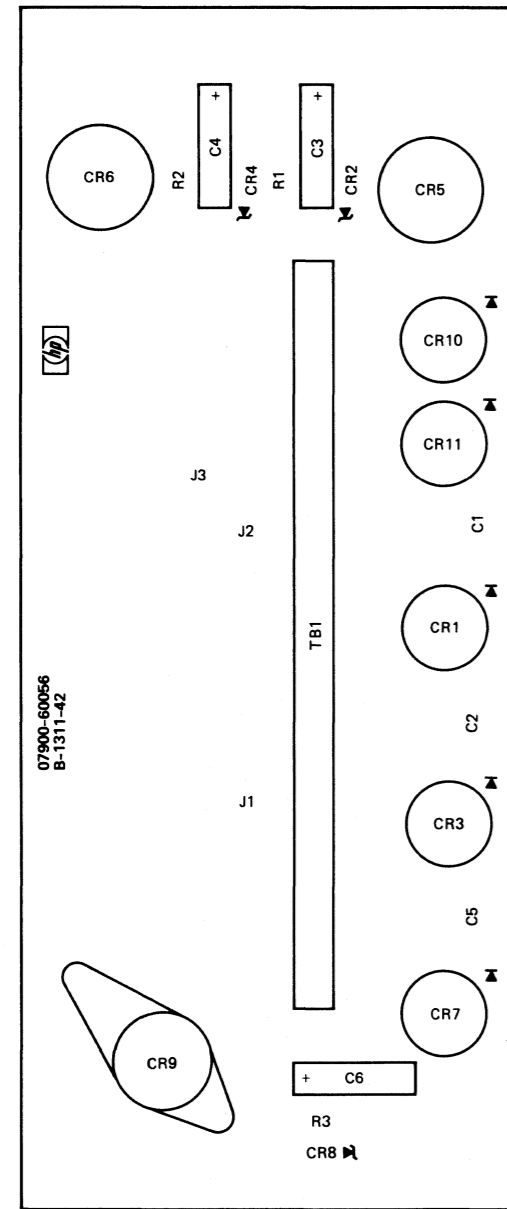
DC Interconnect Assembly A18 Parts Location Diagram
